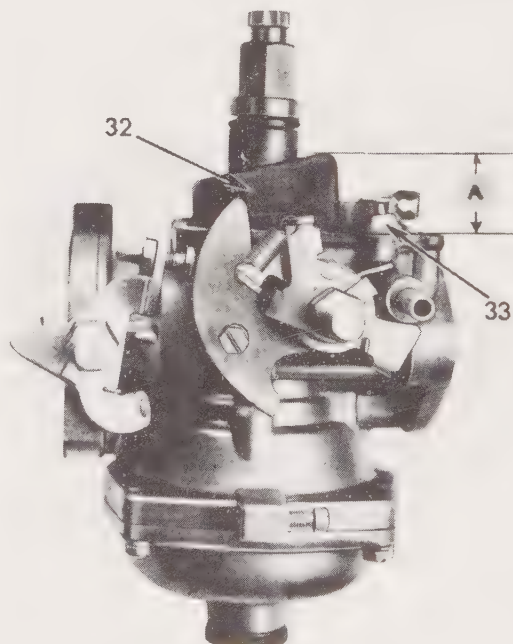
32 Float level adjustment on Stromberg carburettor. Dimension A = $\frac{3}{4}$ in (18 mm).
